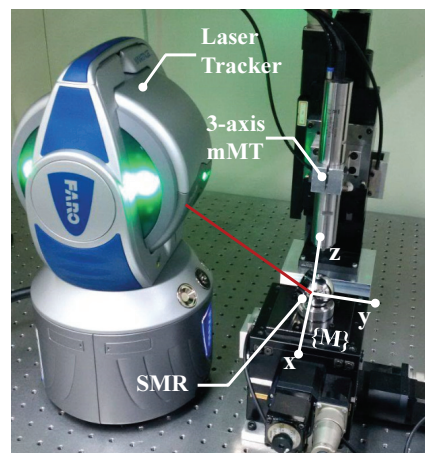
Experimental setup for the circular test using laser tracker in the miniaturized machine tool
